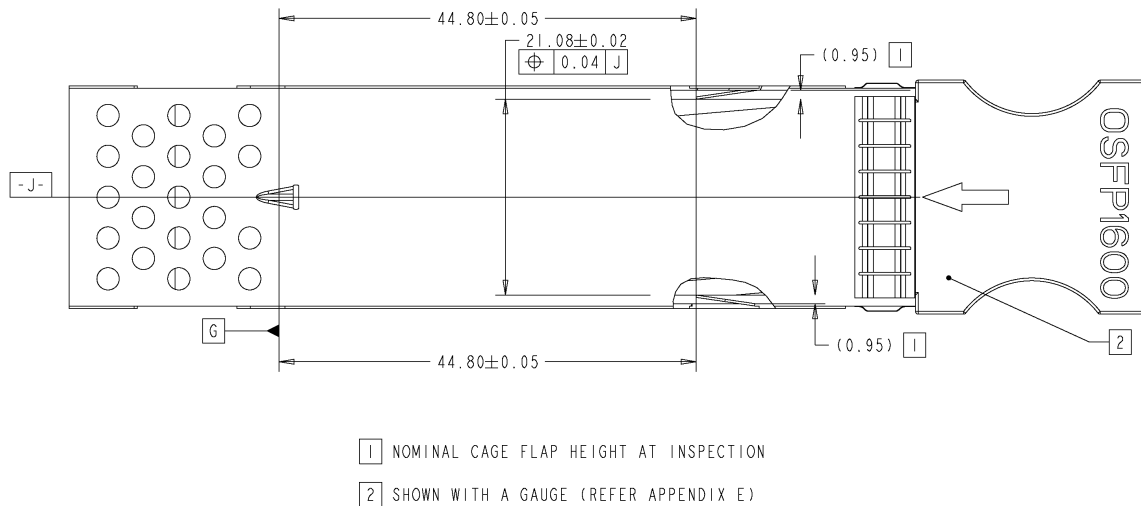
OSFP1600, cage latch flap, dimension from stop
